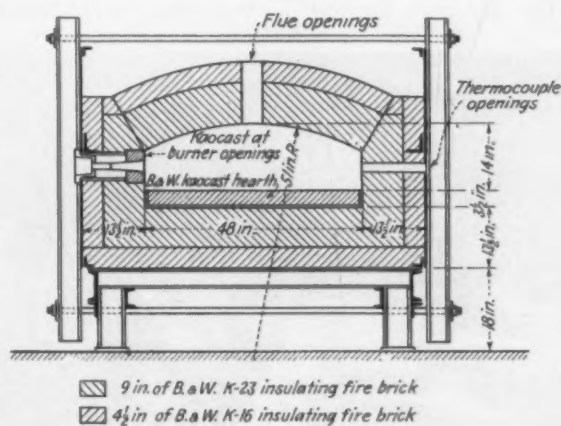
End section through one of the 50-ft steel wire or rod patenting furnaces. Use of lightweight B & W insulating firebrick is shown.
